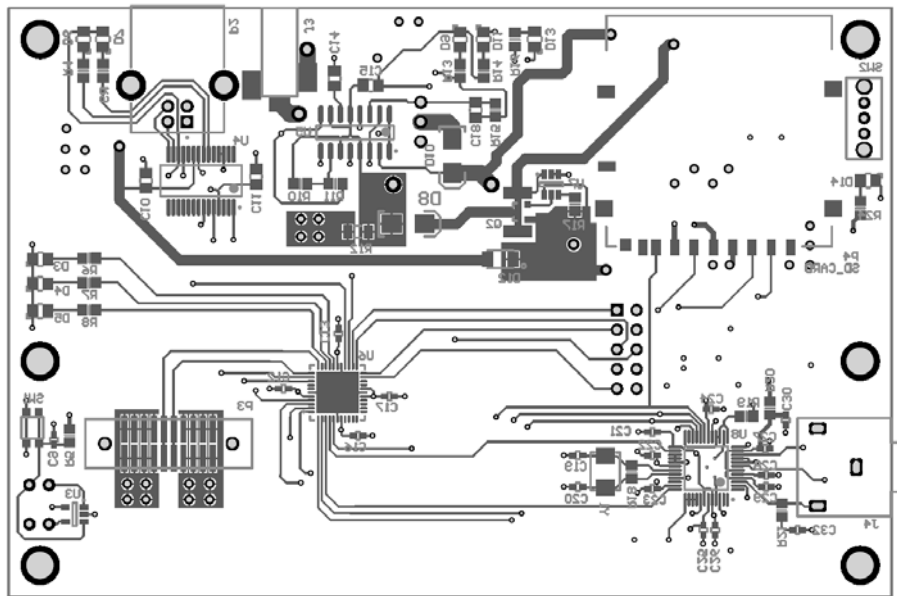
SBT main control module PCB - BOTTOM ROUTING layer.
